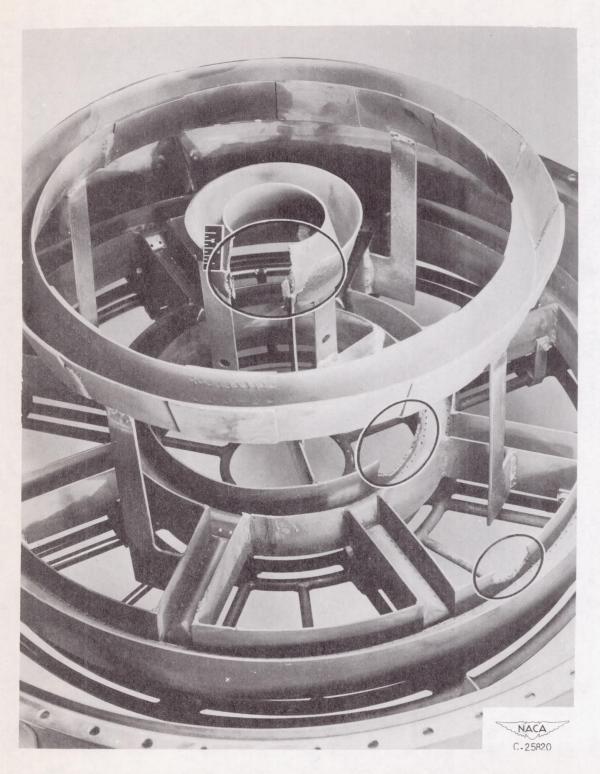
Typical H-gutter failure and trailing V-gutter failure on surfaces not obstructed by intersecting gutters.
